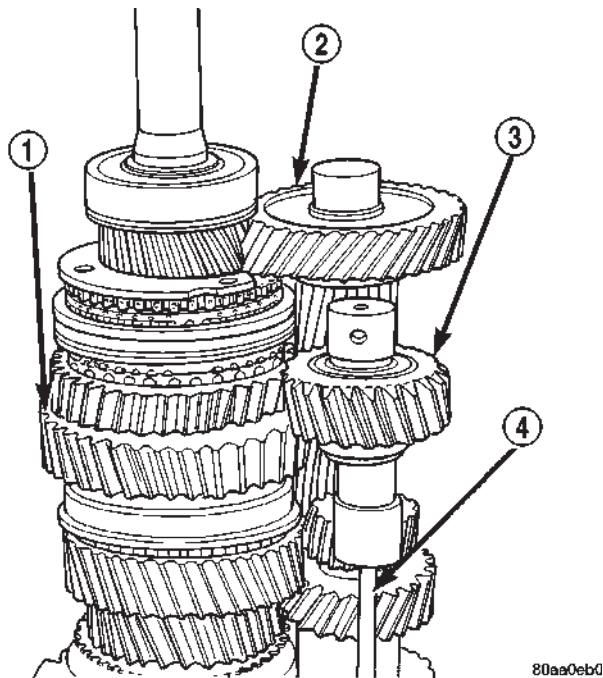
Reverse Idler Assembly On Assembly Fixture Tool
